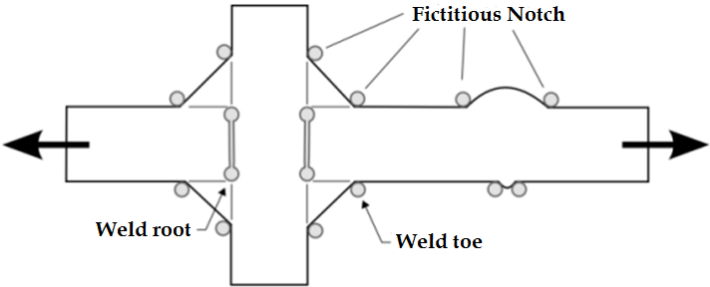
1- 7 Rounding of the weld toe and weld root in the effective notch stress method
